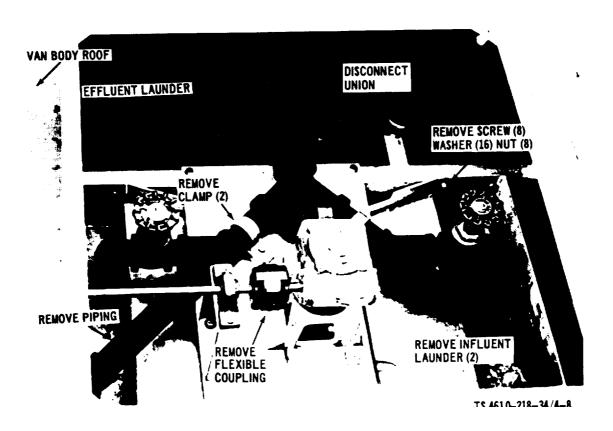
Aspirator Manifold Assembly and Flexible Coupling, Removal and Installation
